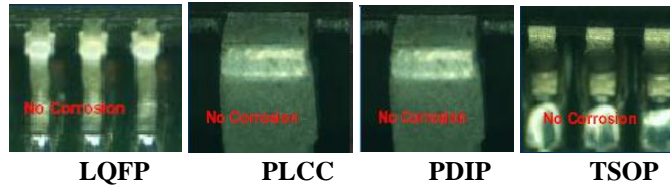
SnPb-package on board whisker (SnPb mounting) at THT 3000hrs
